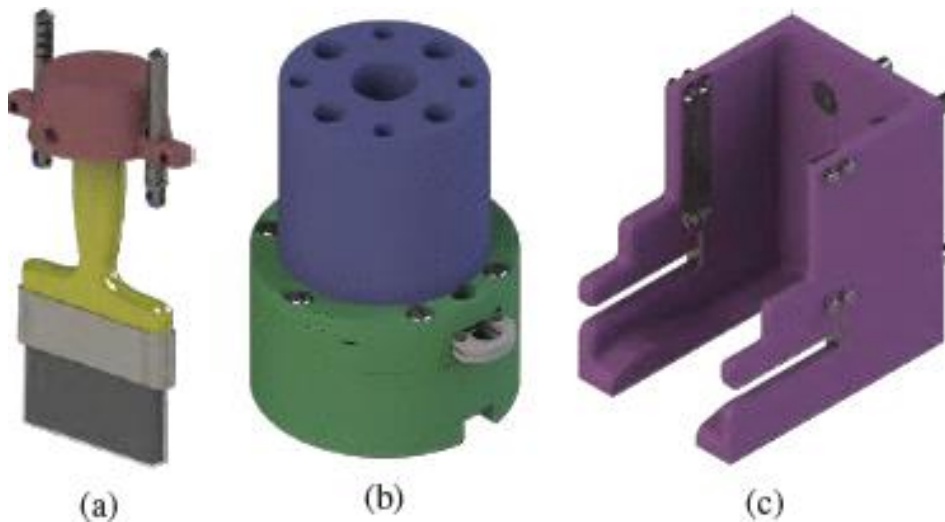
a) Tool and connector, b) Robot arm module, c) Tool housing (Berenstein et al, 2018, pp. 592-598)
